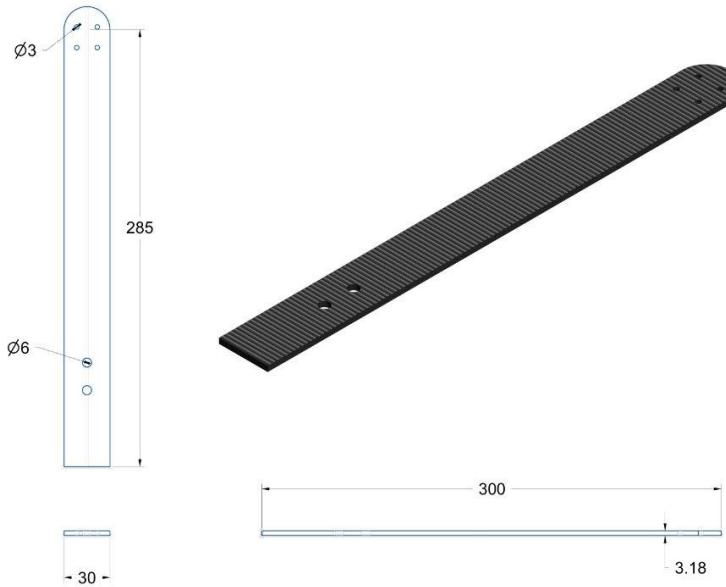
Drone Arm Engineering Drawing (Not to scale) in mm
